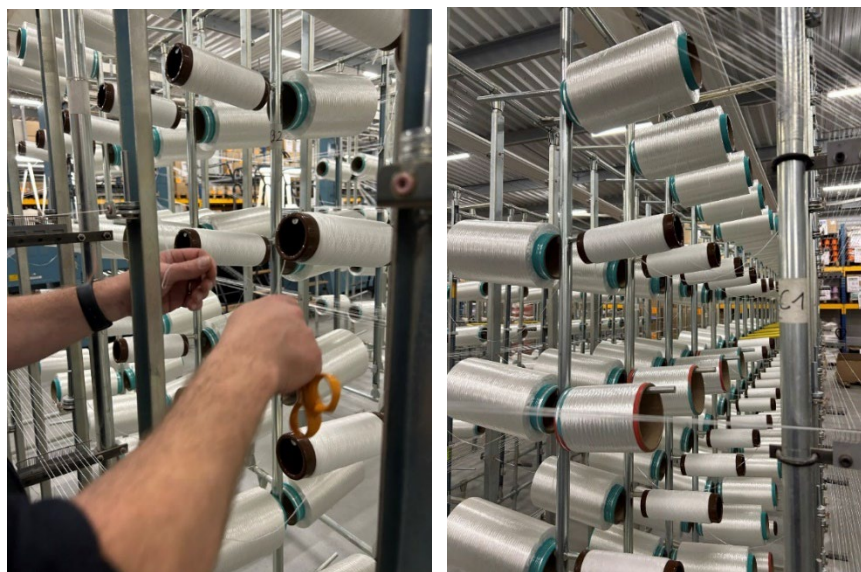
Installation of the 32 spools on the spool holder of the knitting machine
